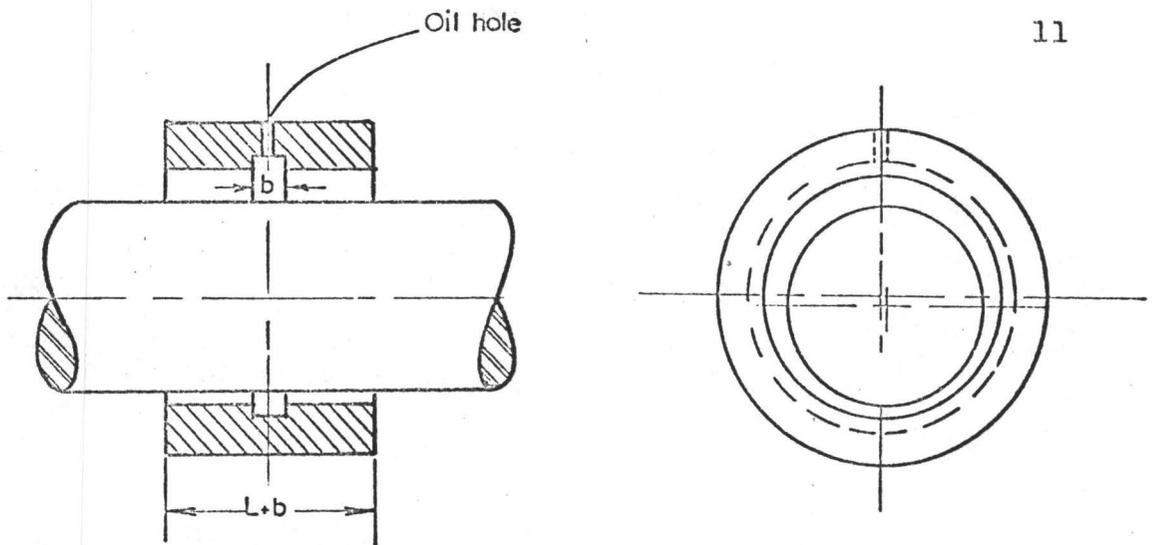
9 Full_cylindrical journal bearing with a circumferential oil groove
